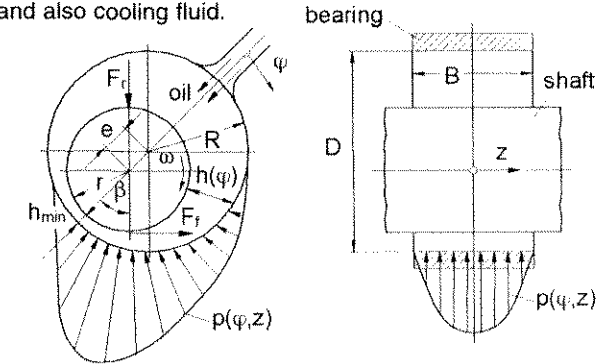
Schematic drawing of a radial cylindrical hydrodynamic bearing
